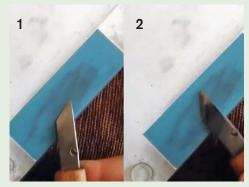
shows the best method of sharpening a straight edge skewed blade using abrasive films
